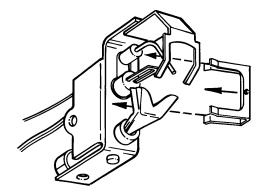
IGNITOR AND FLAME SENSOR ASSEMBLY
